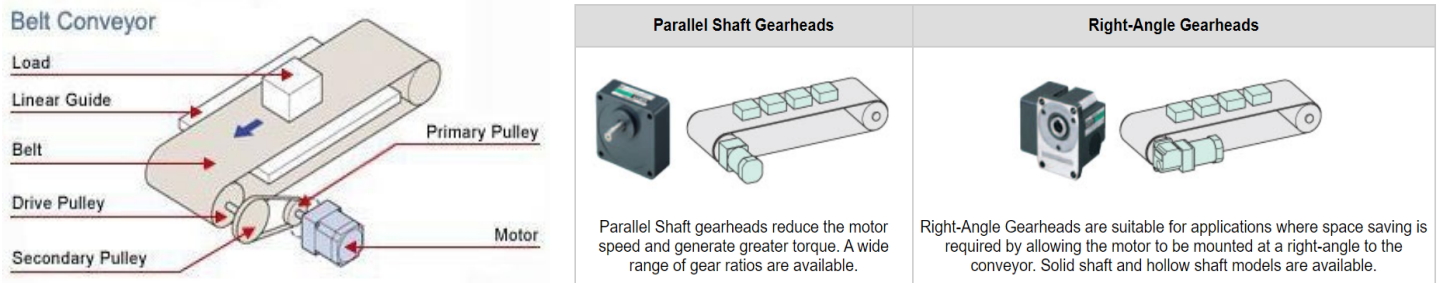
A) Layout of a typical conveyor belt system. B) Parallel Shaft versus Right-Angle Gearhead layouts [Oriental Motors, <https://www.orientalmotor.com/applications/conveyor-belt.html>]
